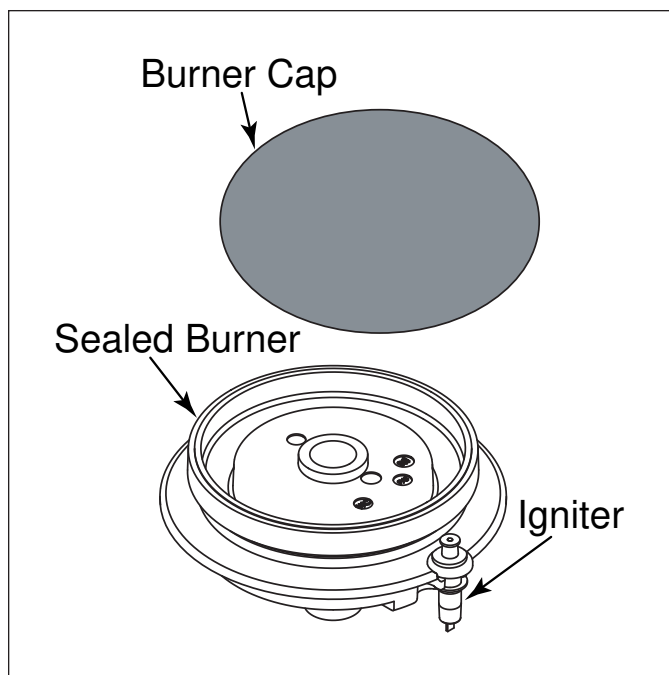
A Stacked Dual Burner Assembly (SWS 17000000)
